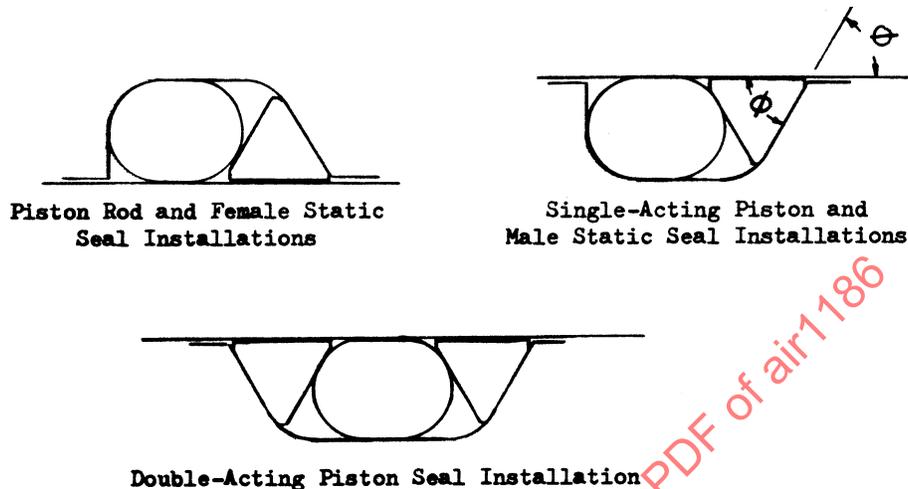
BACKUP RING AND SEAL GROOVE GEOMETRY
